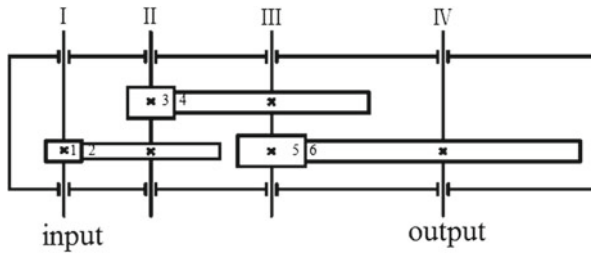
Sketch of a three-stage cylindrical gear reducer
